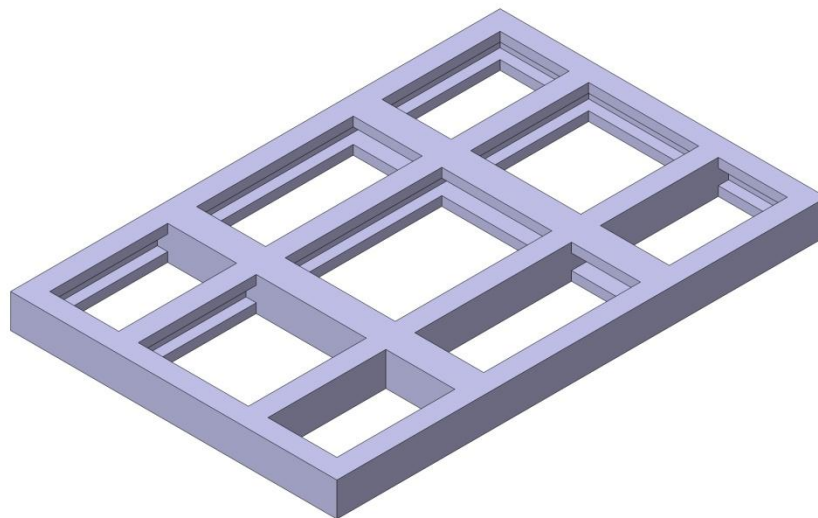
Cad Model of C section Mini Tractor Trolley Chassis
